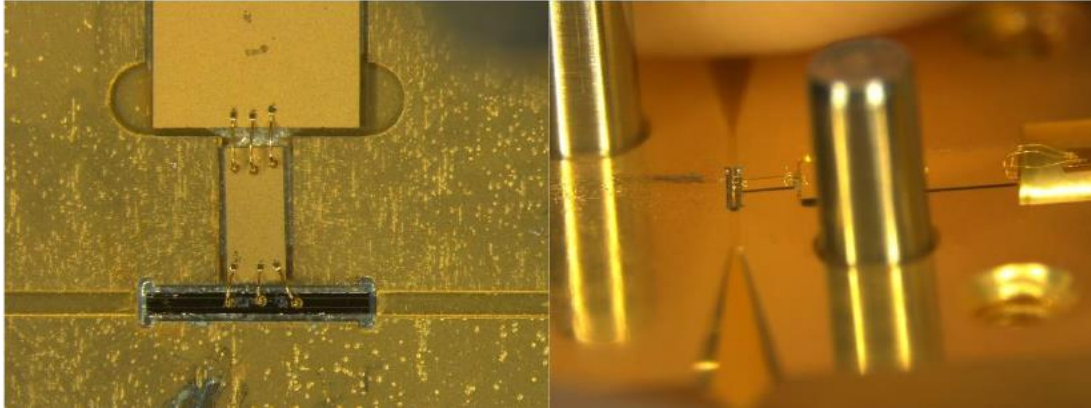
Block integration of a “Device E” with solder-mounting inside a micro-machined waveguide.
